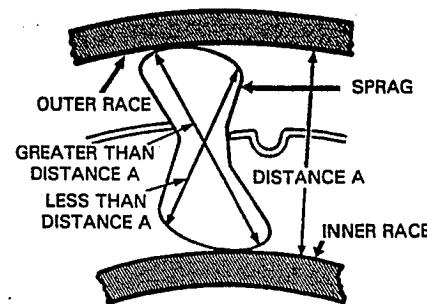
Cross section showing sprag clutch construction. (Cadillac)
